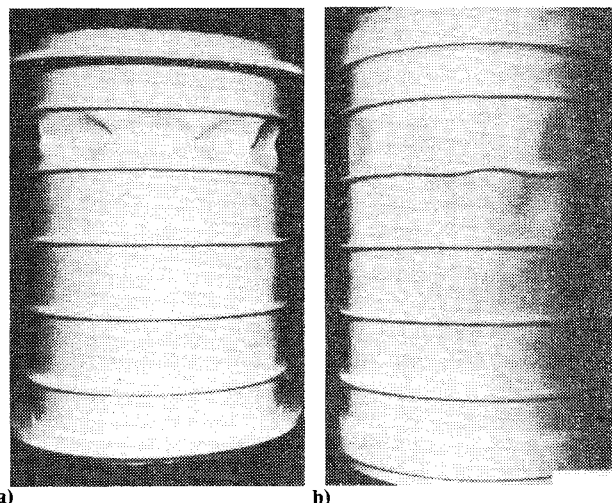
Buckling patterns in ring-stiffened cylindrical shells: a) the cold-bent and welded specimen BR-4, ($p_{cr} = 390$ psi); b) the machined specimen BR-4A, ($p_{cr} = 540$ psi) (from Wenk, E., Jr., "Pressure Vessel Analysis of Submarine Hulls," *Welding Research Supplement*, June 1961, p. 277).
